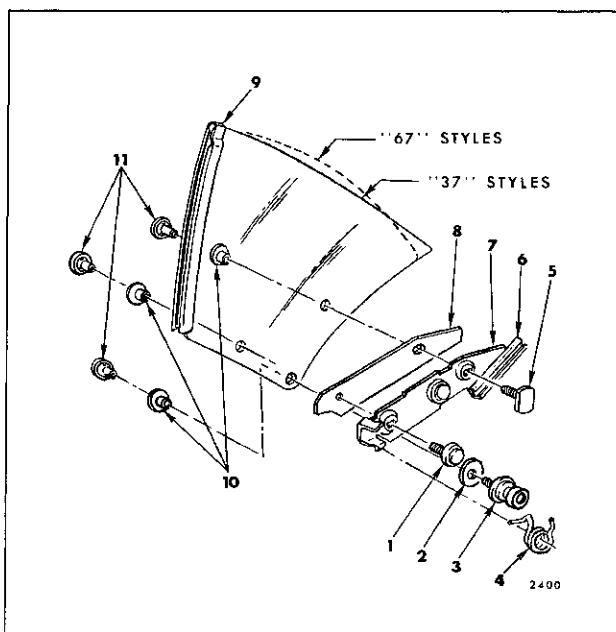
Rear Quarter Window Assembly - "F" Styles
